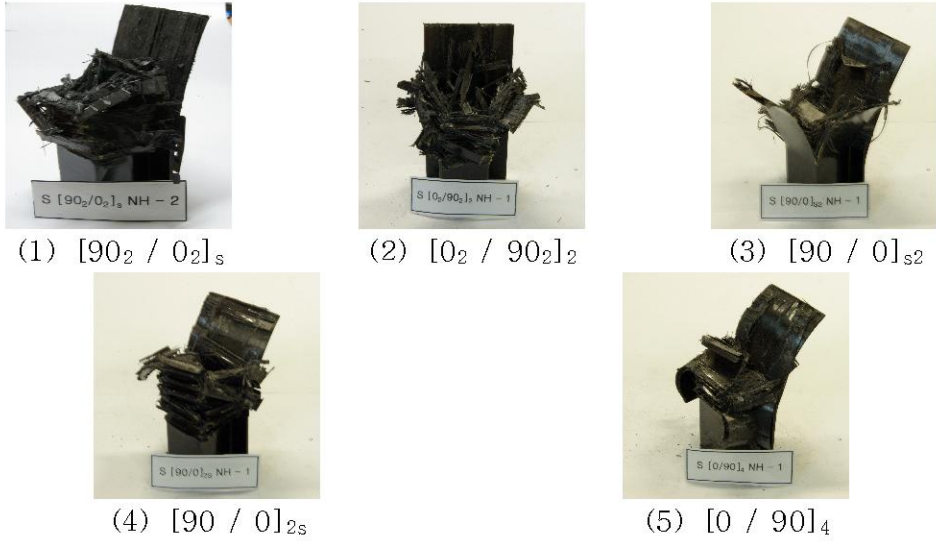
Shape of collapsed specimen (Non hydrothermal, outer angle 90°)
